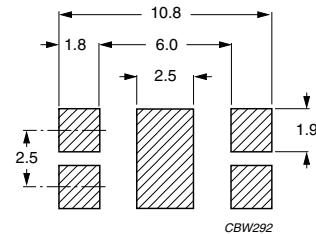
Solder lands for wave soldering of CMS2-5.6/3/8.9.
